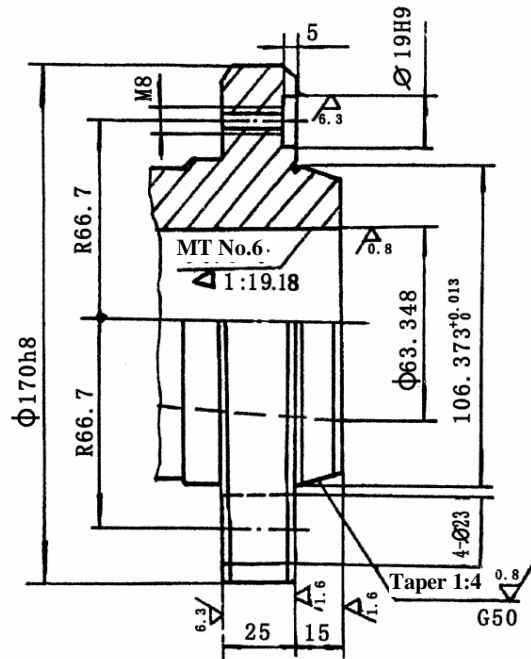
Structure of spindle nose ISO702/ No.6
